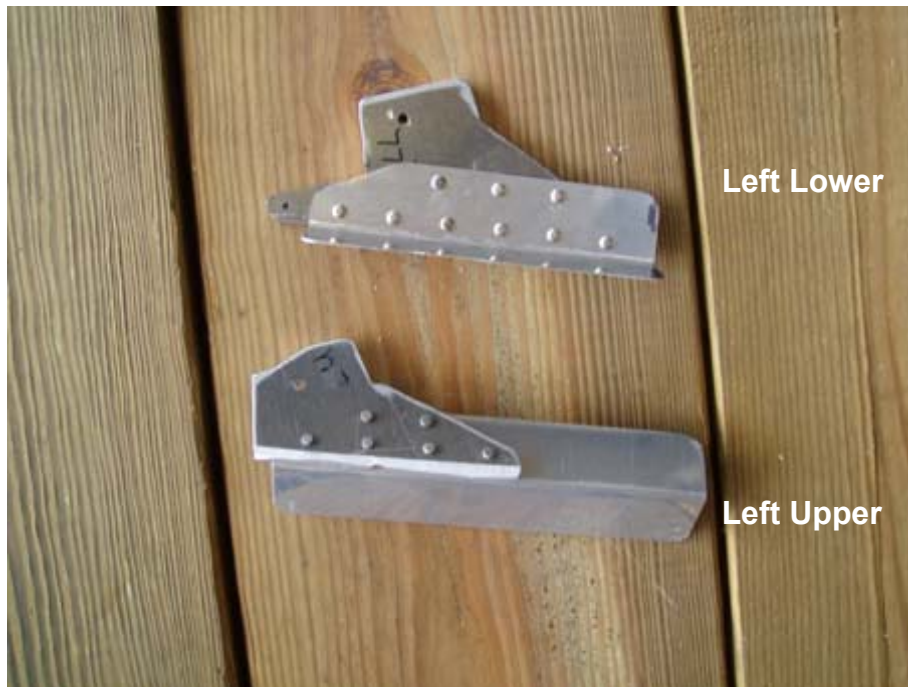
Left Upper and Lower Hinge Brace Assembly (Not installed).
